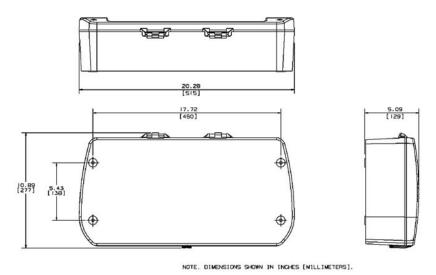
Mounting Drawing [dimensions in inches (mm)]
